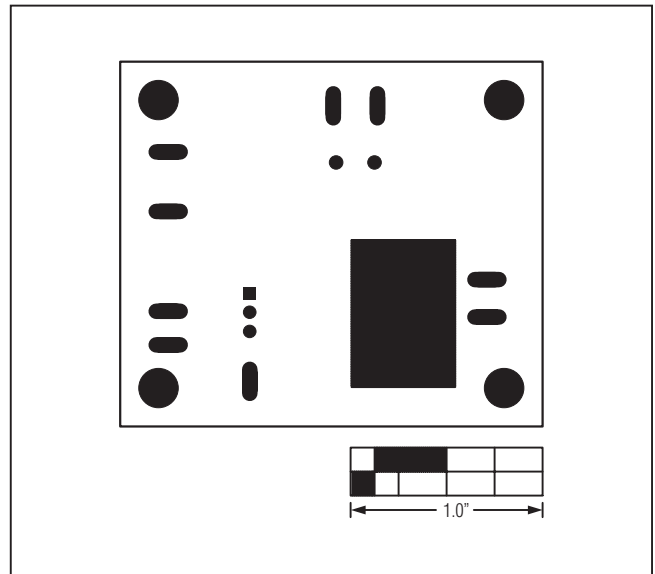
MAX17502E EV Kit PCB Layout—Bottom Solder Mask
